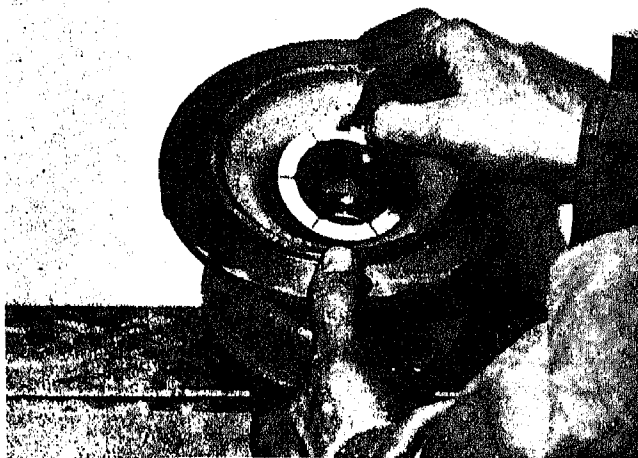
Remove retaining sleeve and thrust bearing
